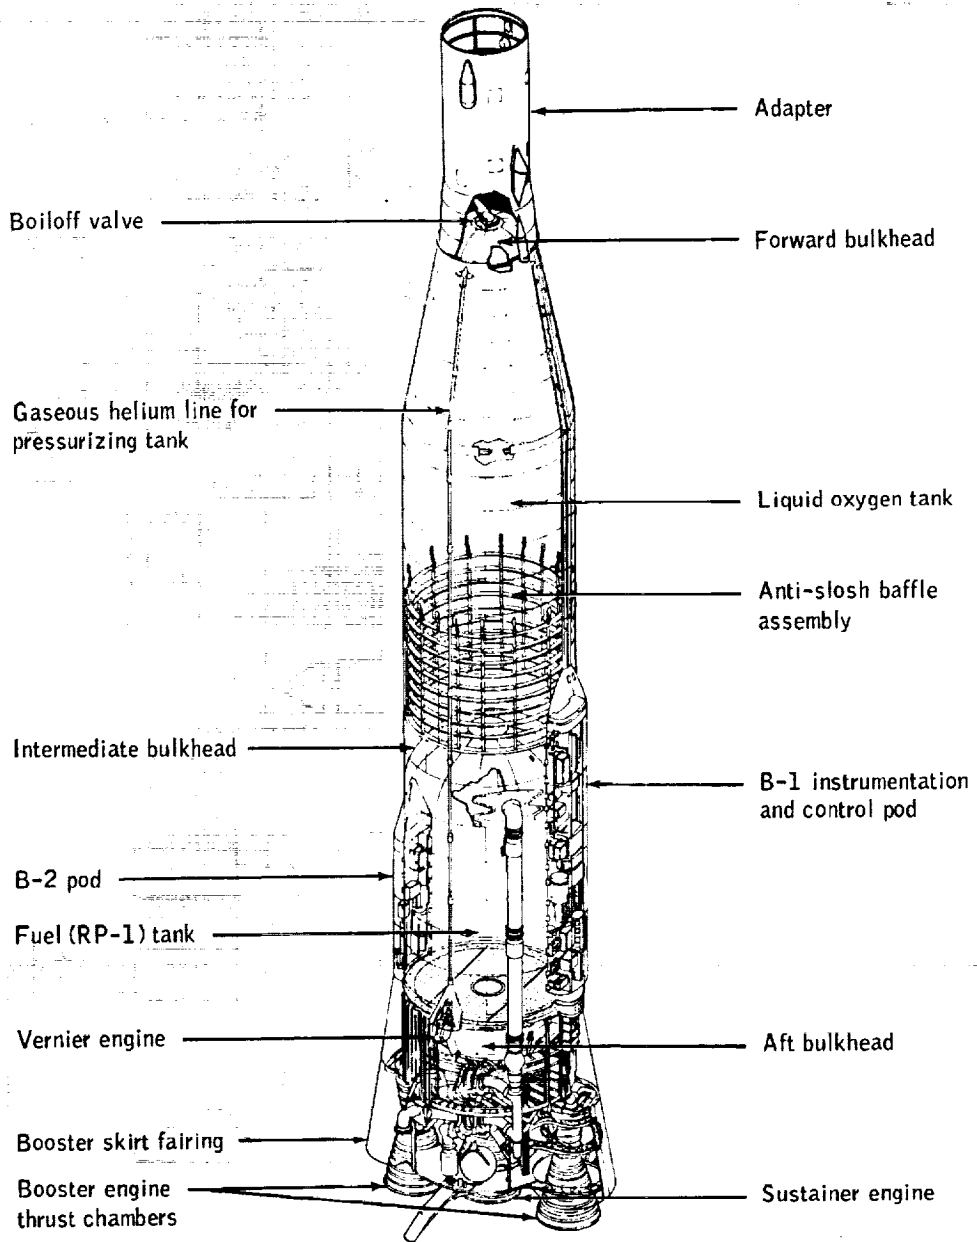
Cutaway drawing of target launch vehicle.
